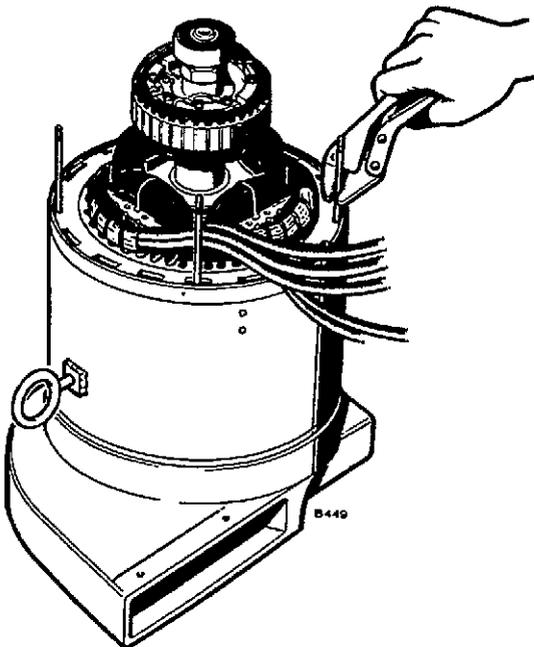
STATOR THROUGH-STUD BOLT REMOVAL
